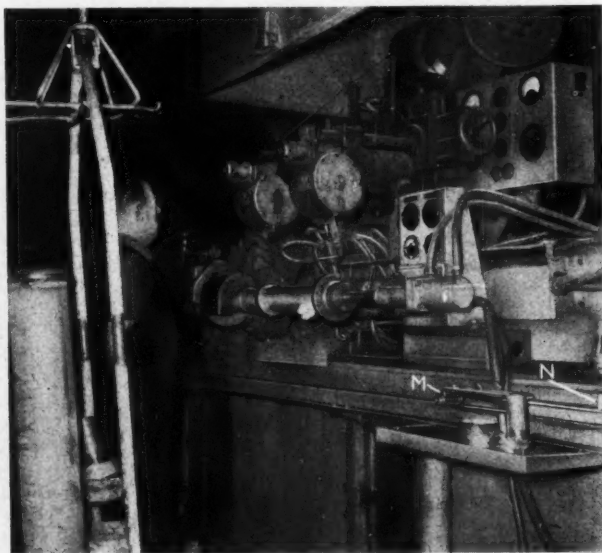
At this set-up for CO₂ welding the piston-heads to the inner tubes, location is facilitated by the trolley fixture *M*. Each weld is completed in a cycle time of 16 sec.
